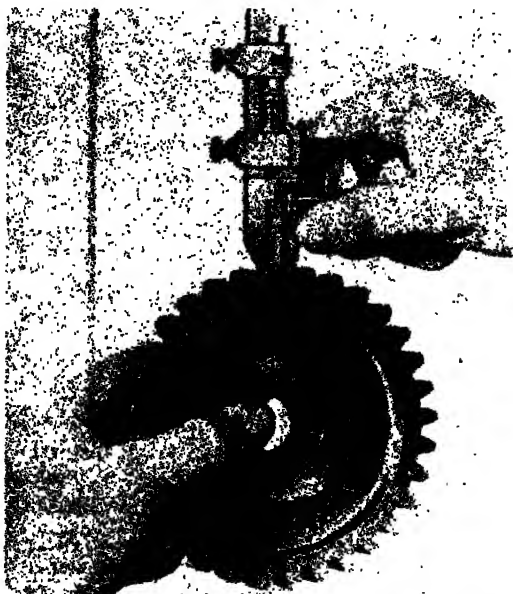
A gear-tooth caliper in actual use. (*The Brown & Sharpe Manufacturing Company*)
